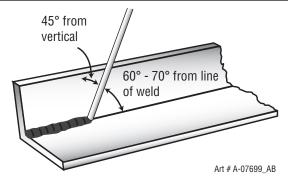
Electrode Position for HV Fillet Weld
